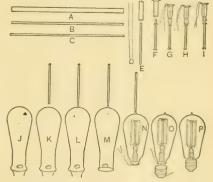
Photograph of the Parts of a Tipped Construction Lamp Showing Some of the Stages in Its Assembly.
